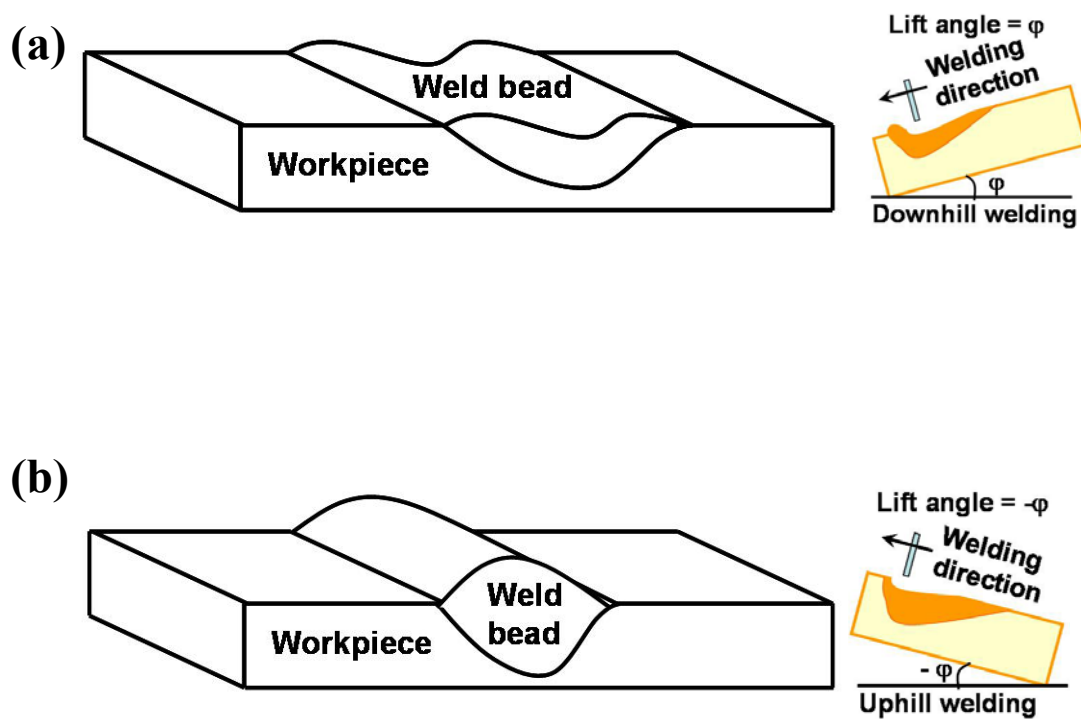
Effect of workpiece inclination on the weld bead geometry (a) downhill welding, i.e. workpiece is lifted from behind the moving welding torch; (b) uphill welding, i.e. workpiece is lifted from ahead of the moving welding torch [9].
